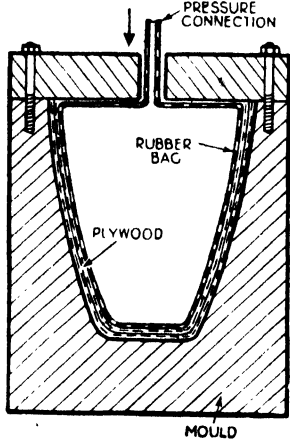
Completely enclosed forms may be moulded by the internal moulding process shown<sup>13</sup>
